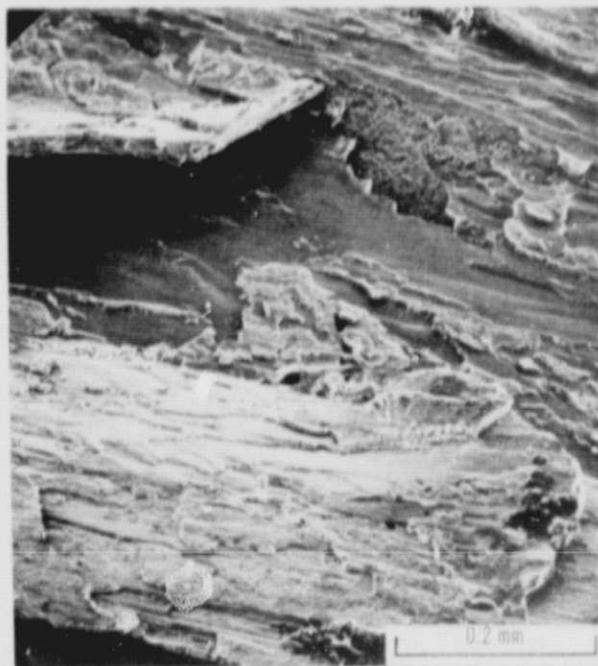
Scanning electron fractographs of 760°C transverse tensile specimen A74-1098-3, strain to fracture 0.50%. (Heat treated 1210°C/4 hrs, 900°C/24 hrs).
